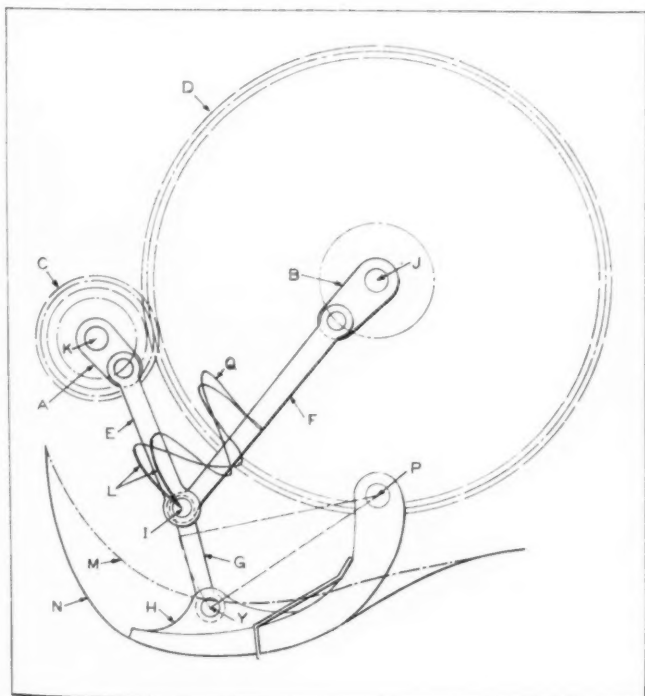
Double-crank Link and Gear Mechanism for Indexing Motion Picture Film
